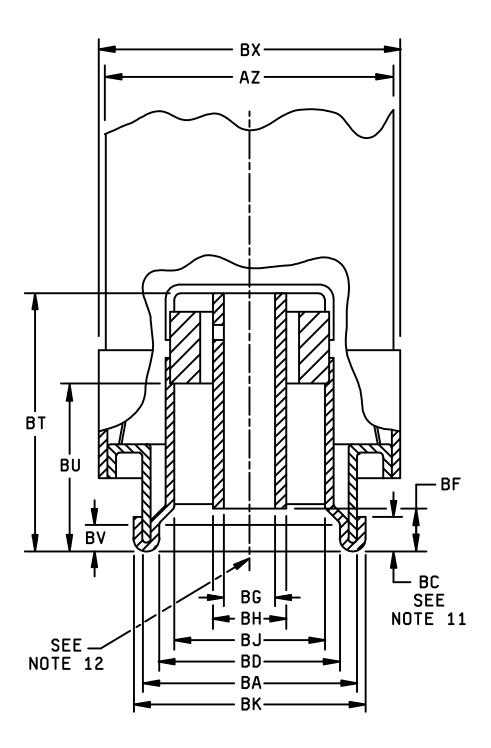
A. Alternate outline drawing of electron tube type DOD-042 (detail enlarged).
